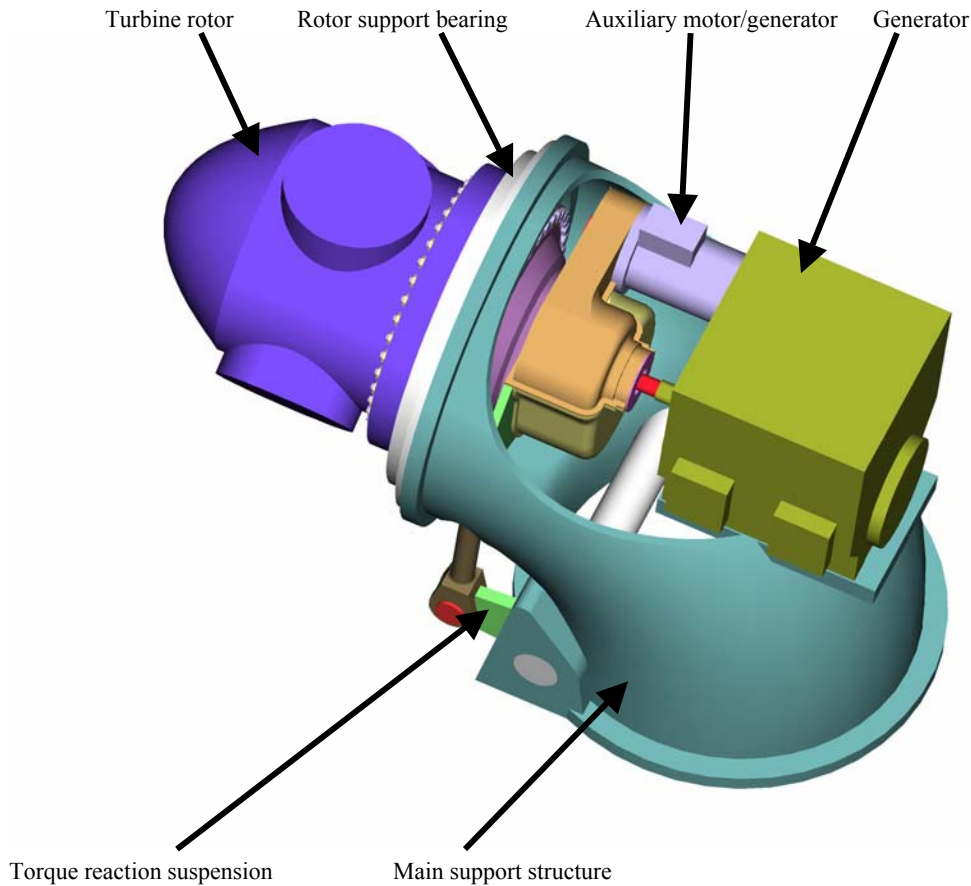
A MINI-MASS gearbox suitable for a twin taper rotor support bearing using an electrical shunt transmission.
